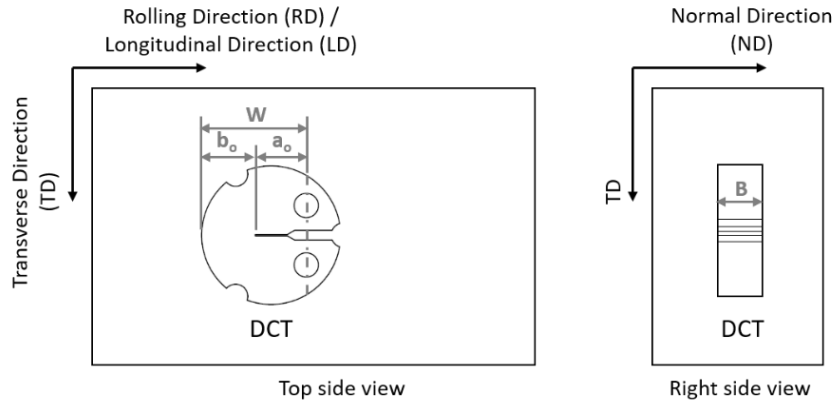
Cutting scheme showing how test samples were fabricated given the longitudinal direction of the W products. The samples were cut by electric discharge machining.
